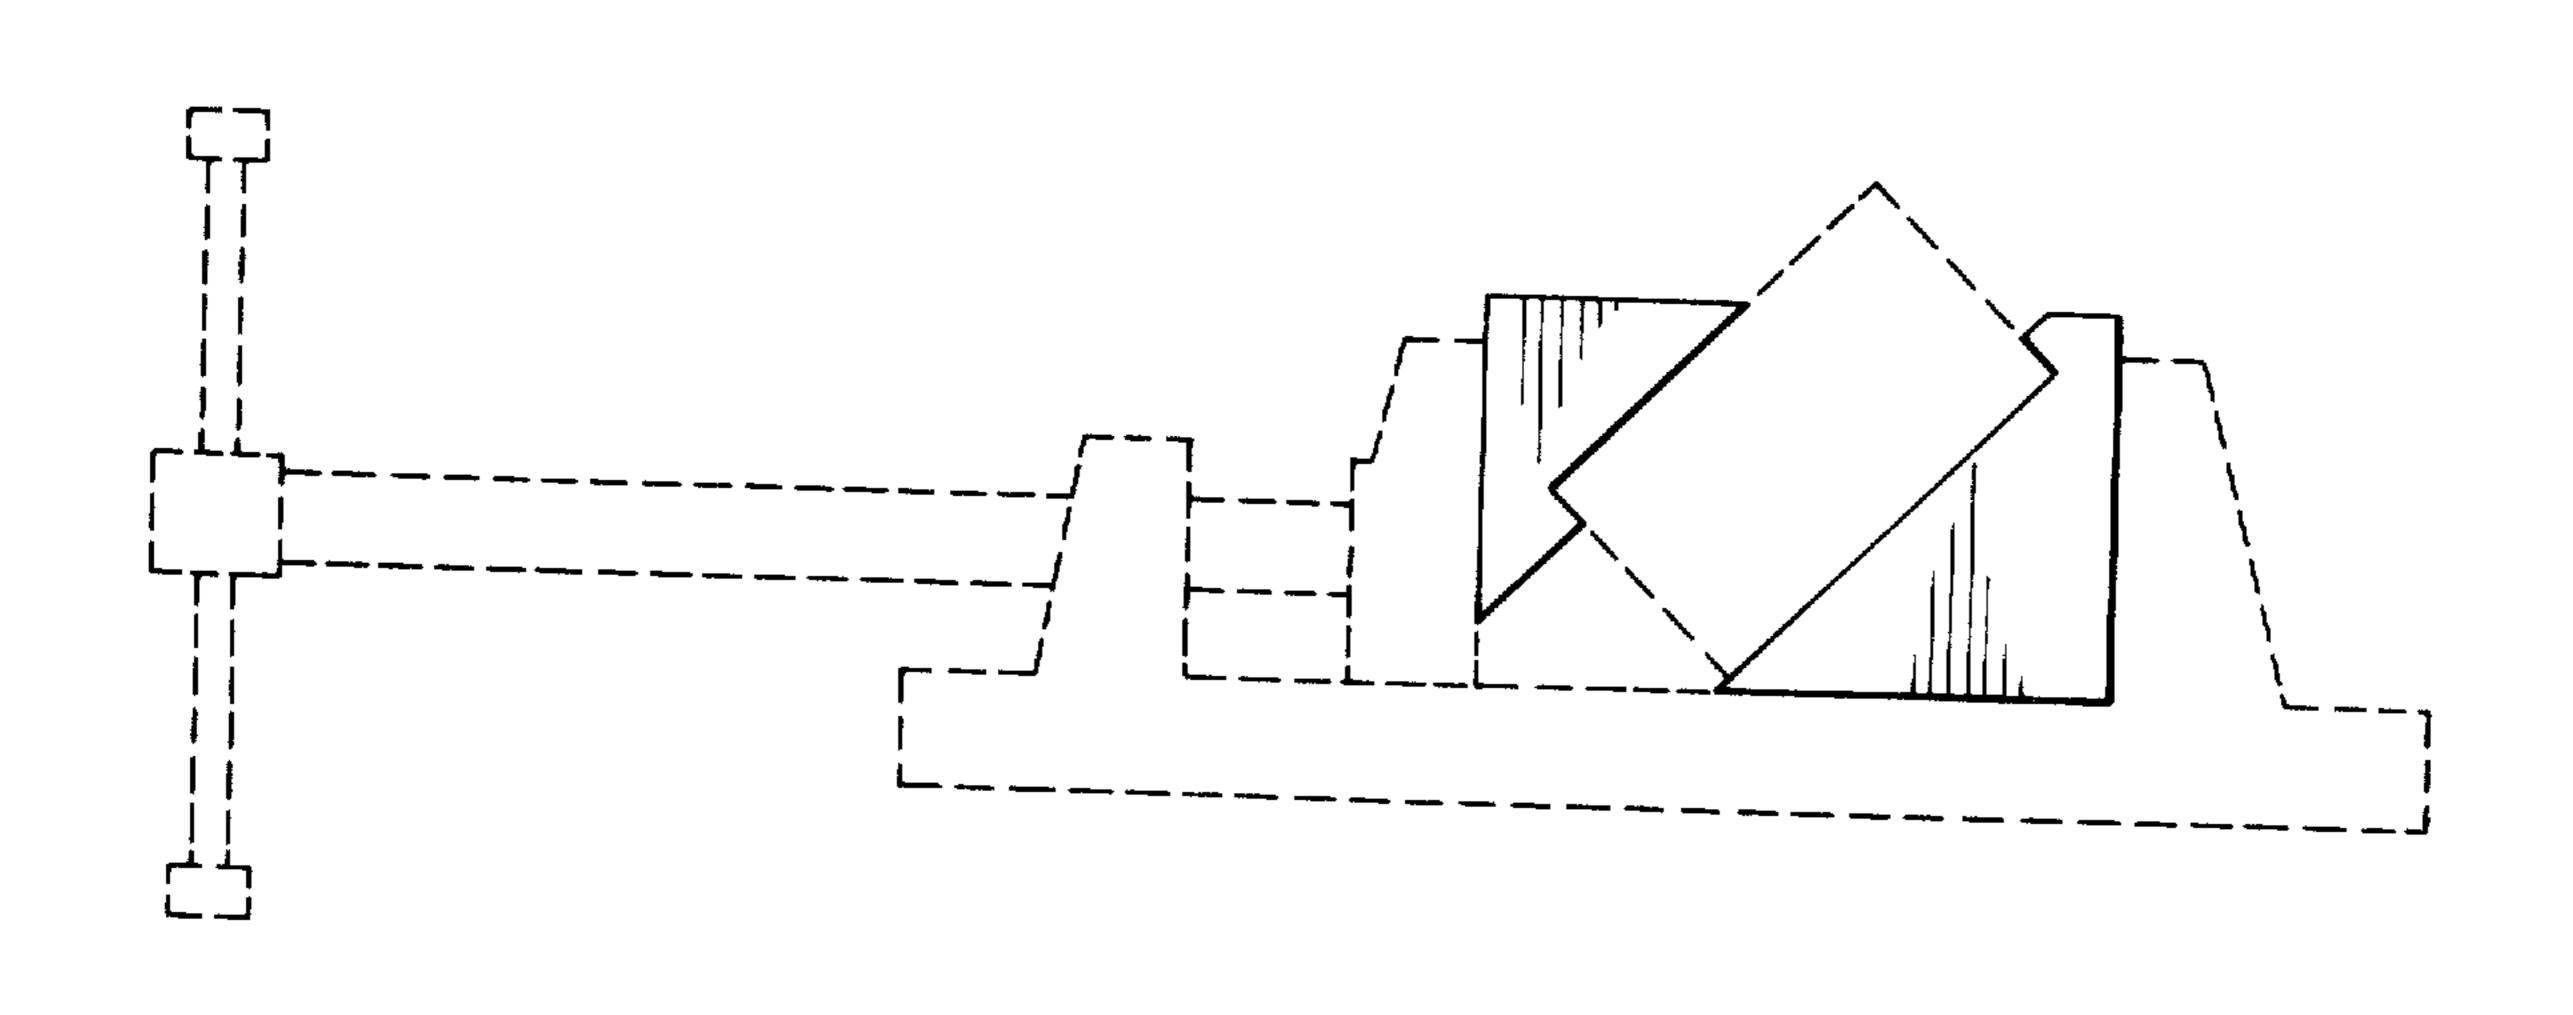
is a side elevational view of the design shown in FIG. 8;
